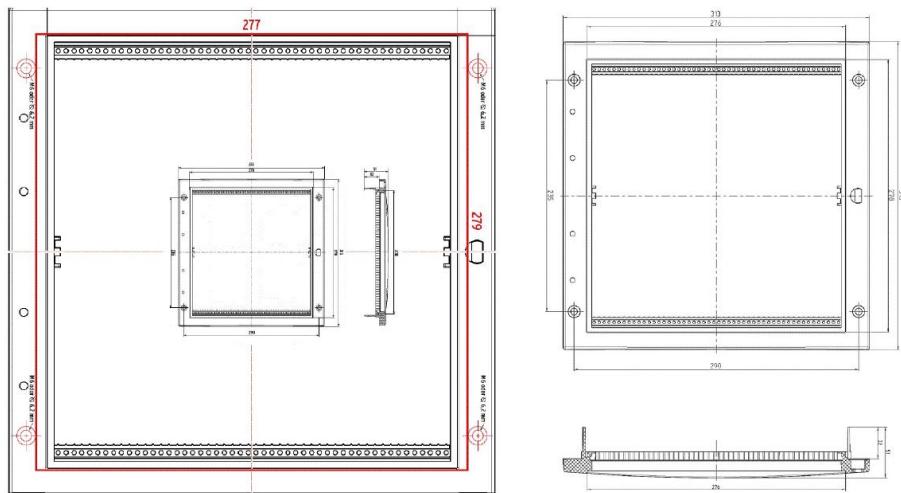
Dimensional drawing of the mounting frame. Red marked are the cut-out dimensions
